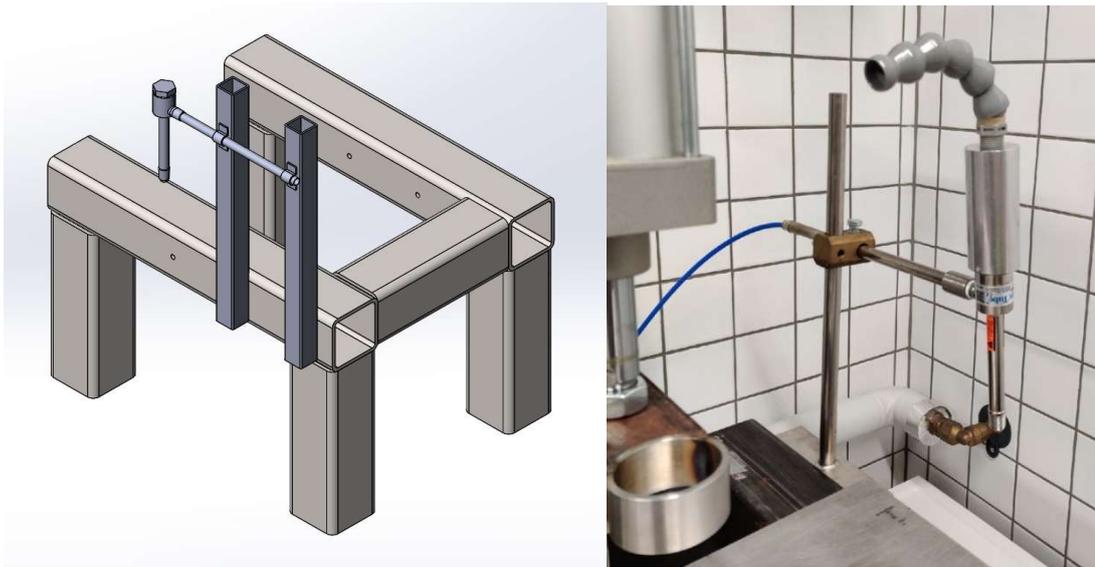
Initial design of cooling mount as Solidworks® model (left) and final version of cooling mount with vortex tube attached to the apparatus base (right).
